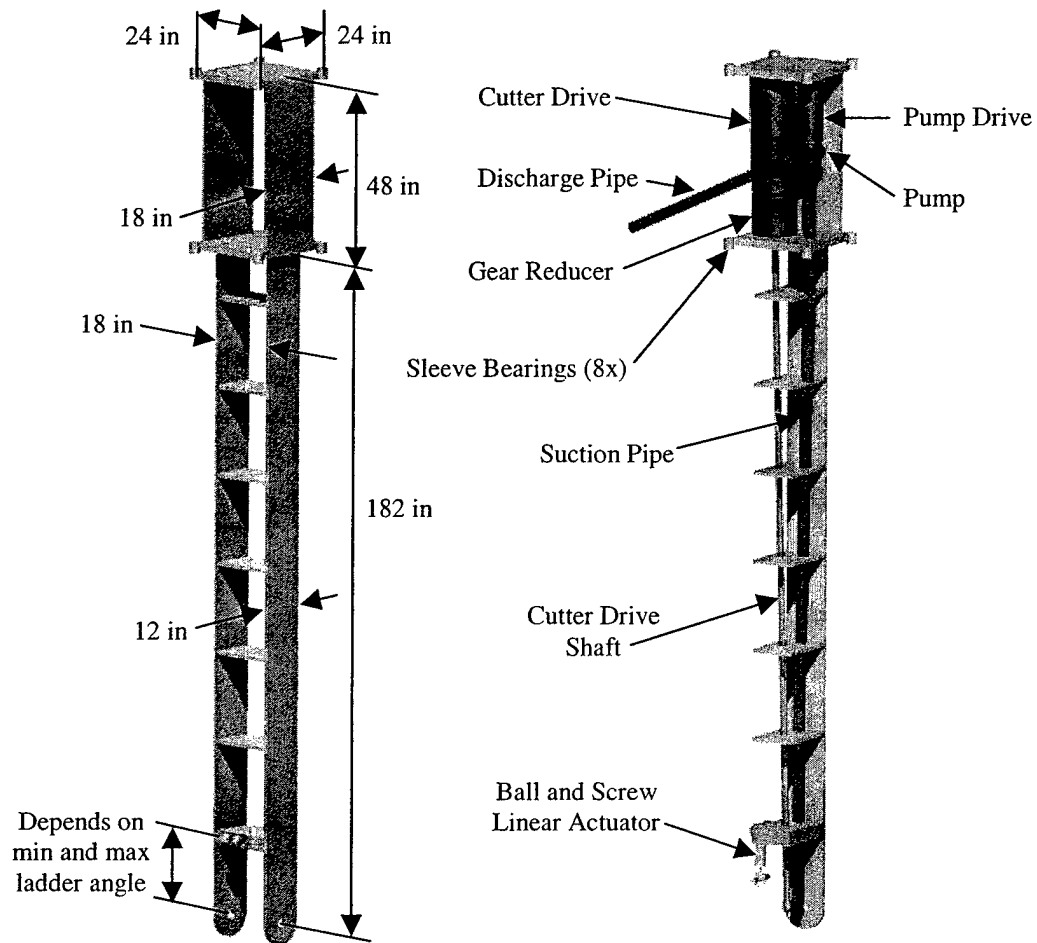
Conceptual Drawing of the Ladder Arm Frame with Cutaway Rotated 90 Degrees Showing Equipment
